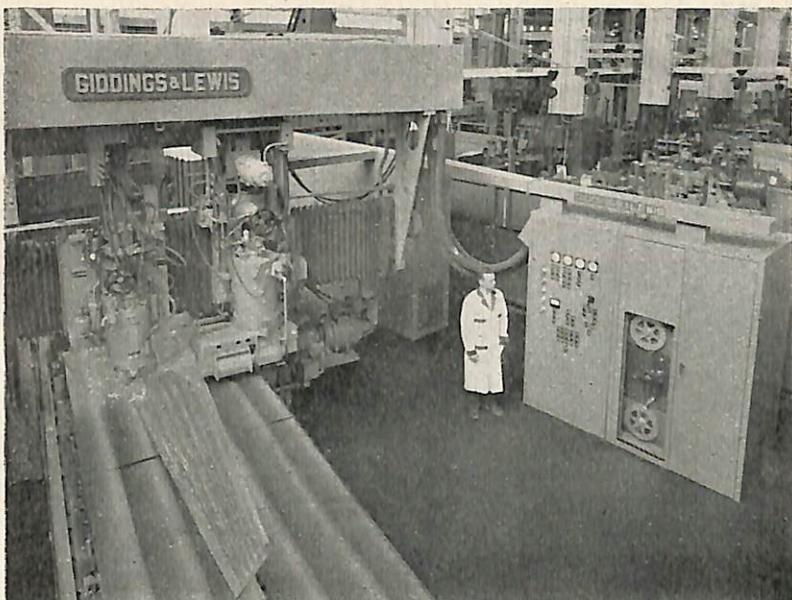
General View of a Giddings & Lewis Skin and Spar Milling Machine controlled by the Numericord System. The Machine Play-back Unit may be seen at the Right
